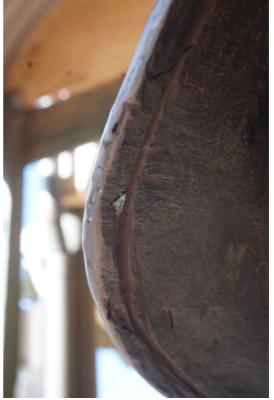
Detail – corrosion product inside small casting defect.
